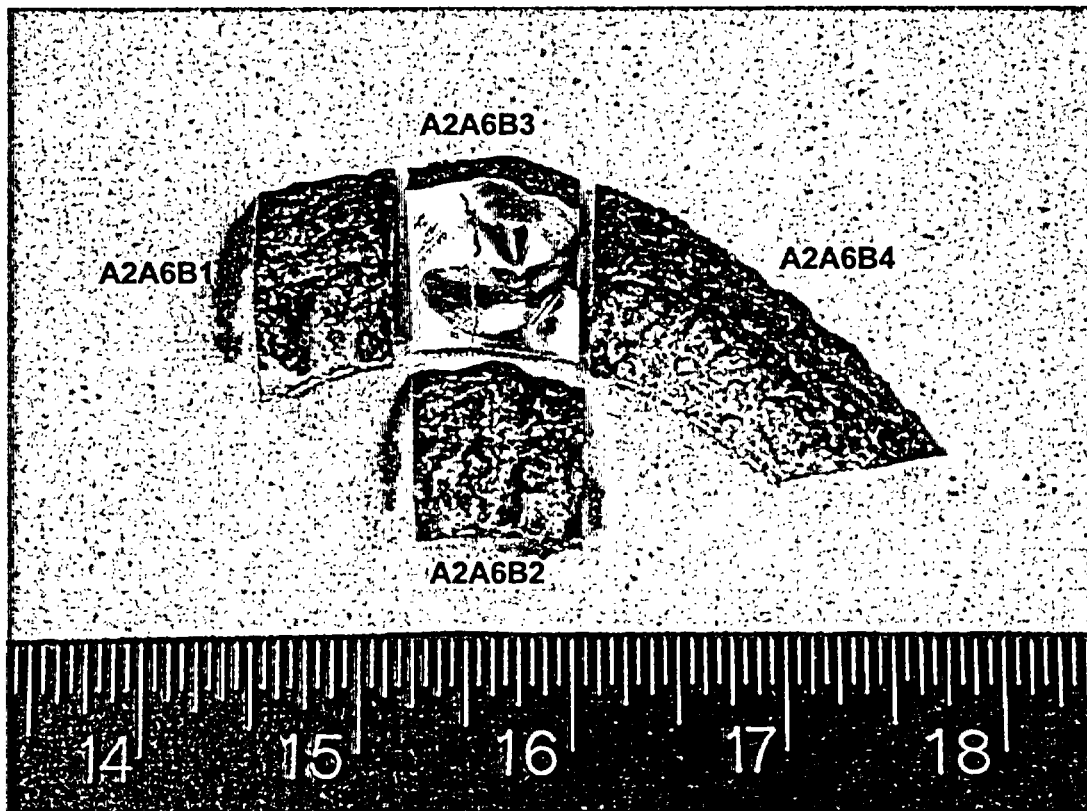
Piece A2A6B after sectioning. The bottom surface of A2A6B2 was mounted. The axial crack in A2A6B3 was opened up for SEM.
